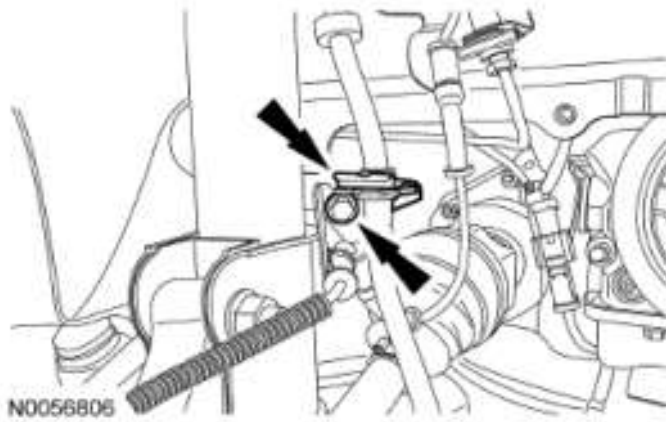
Locating ABS Sensor Retaining Bolt And Brake Hose Retainer
